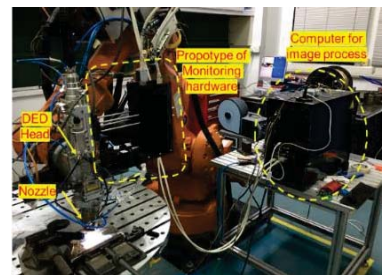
Picture of the prototype of the developed monitoring and close loop control system installed in a DED AM machine.
